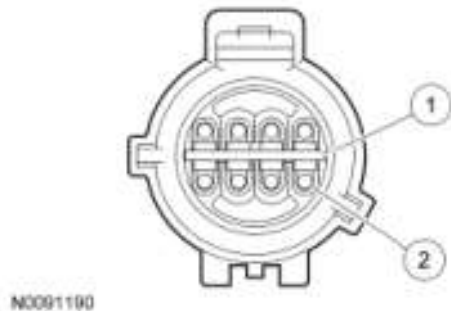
Identifying Shift Motor Electrical Connector Terminal
